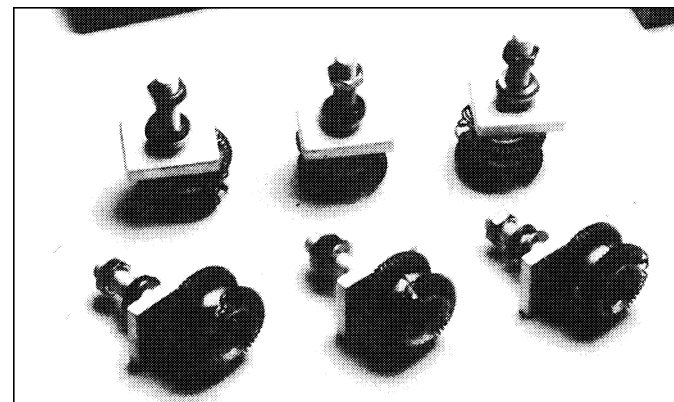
Closeup of Tulips Showing Center and Offset Mountings
